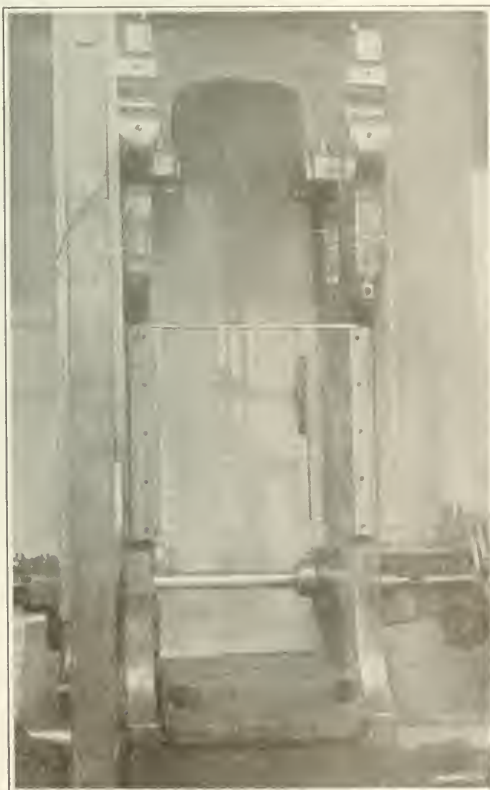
View showing Both Sides of Press Frame after welding is completed and Bearings have been repaired
